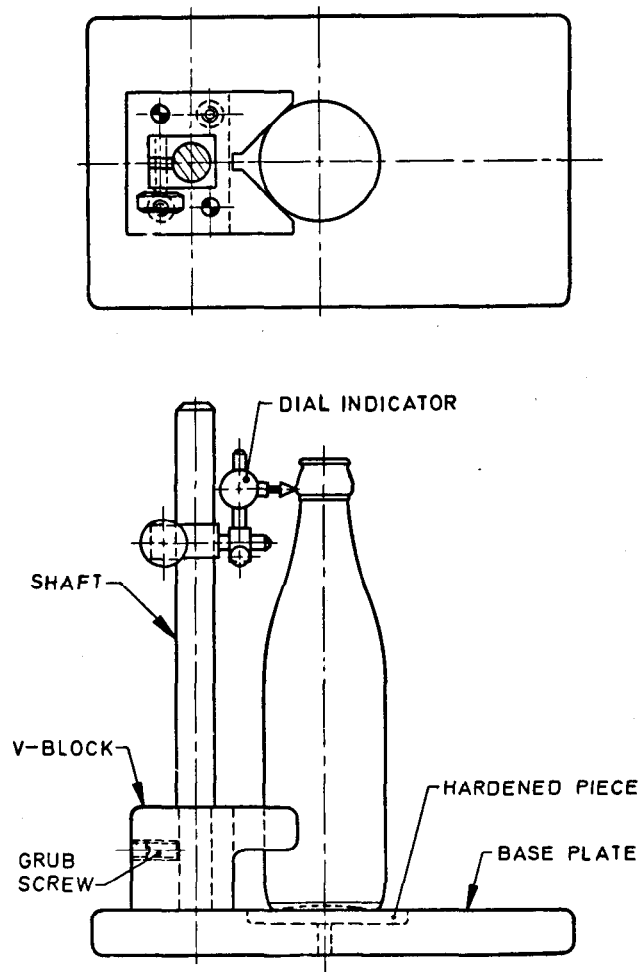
ASSEMBLY FOR TESTING VERTICALITY OF BOTTLE
